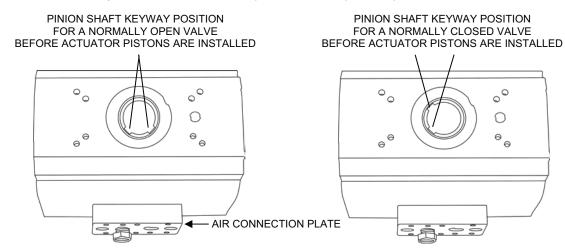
Position of Actuator Pinion Shaft Keyways Prior to Installing Pistons.
